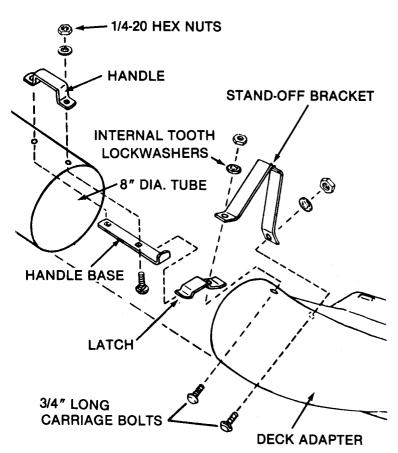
TUBE HANDLE & BRACKET DETAIL
